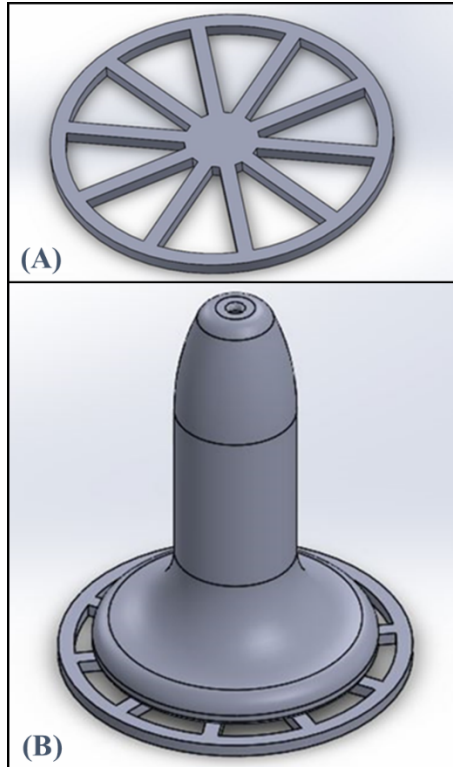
(A) CAD rendering of the setter plate, (B) CAD rendering of the nozzle on top of the setter plate as it will be used during the post processing
